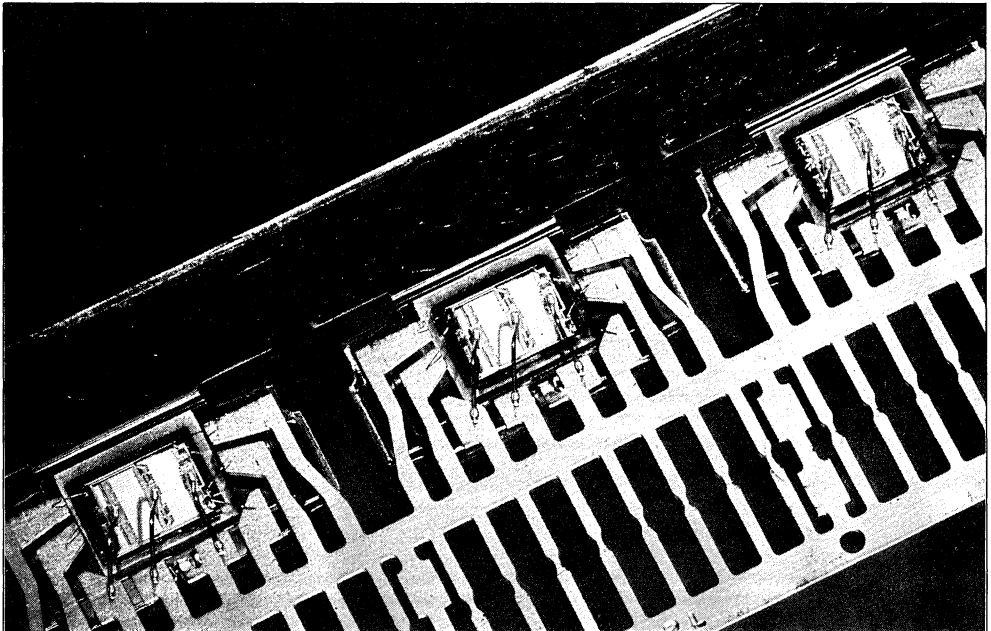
After the wire bonding operation the completed frame assembly is encapsulated in black plastic resin and the parts of the metal frame that served as a mechanical support are removed. The finished parts are then tested and marked with the type number and lot tracing information.
